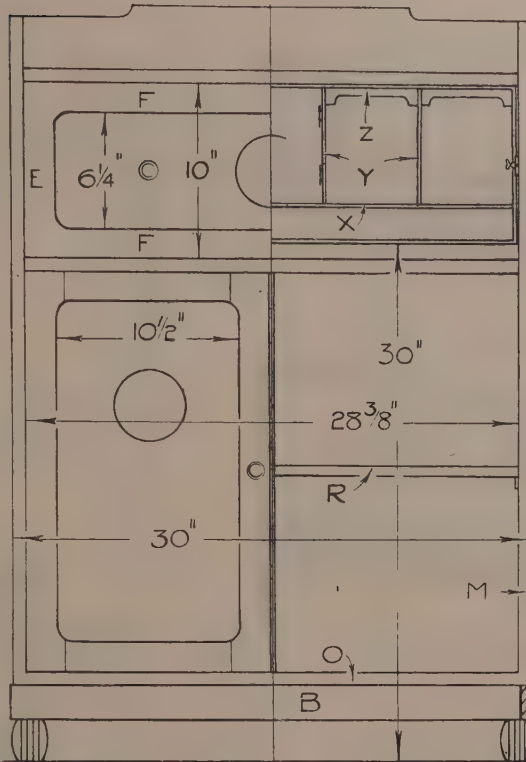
FRONT ELEVATION, WITH SCALE.
